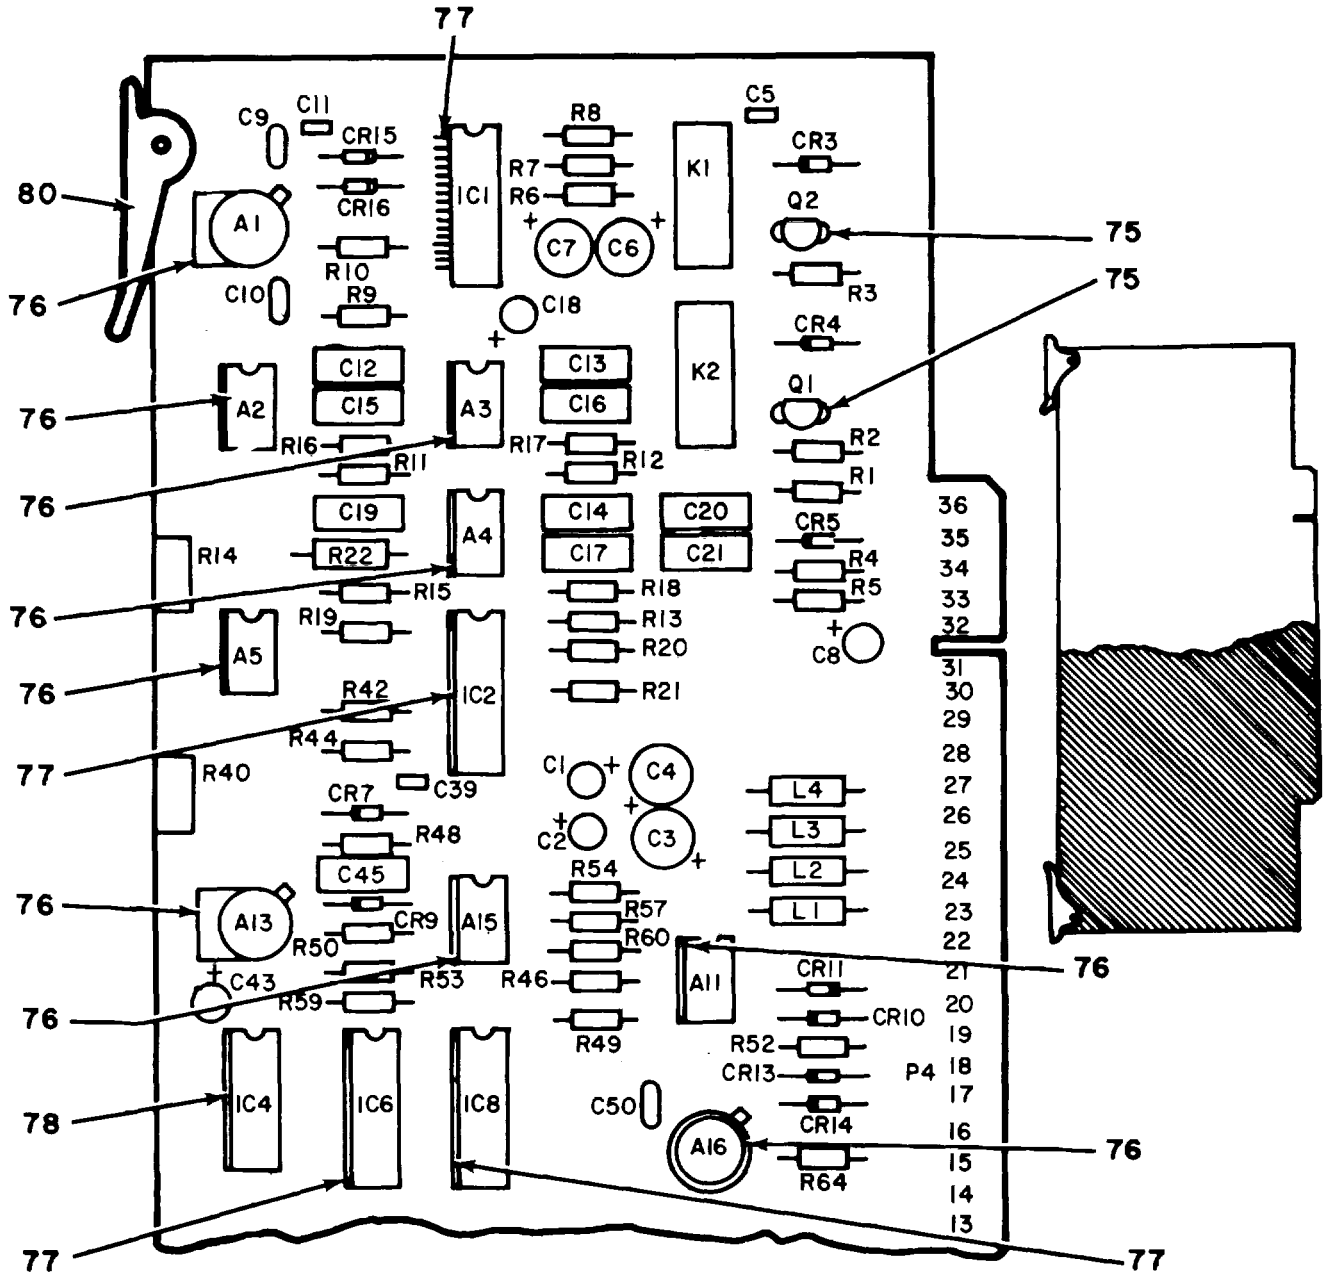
CIRCUIT CARD ASSEMBLY, MASTER (A6), (SHEET 4 of 4)
